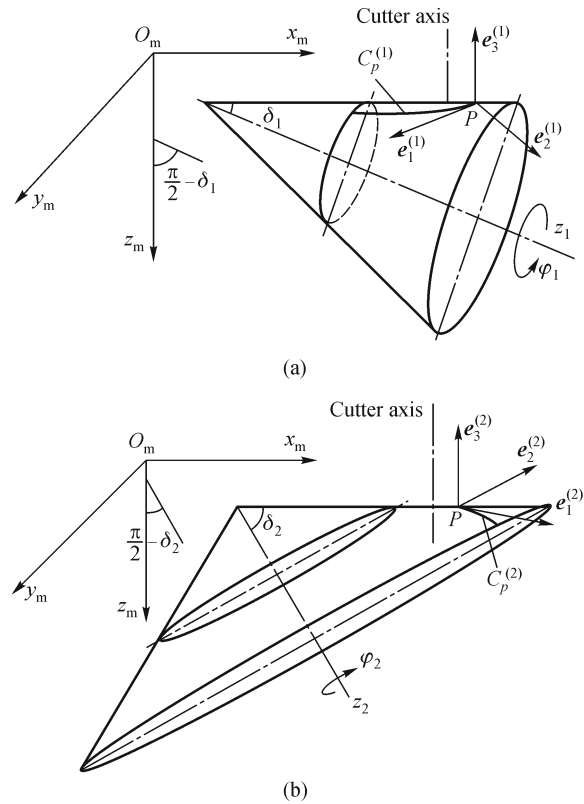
Pose of blank on the worktable. (a) Pinion; (b) gear
